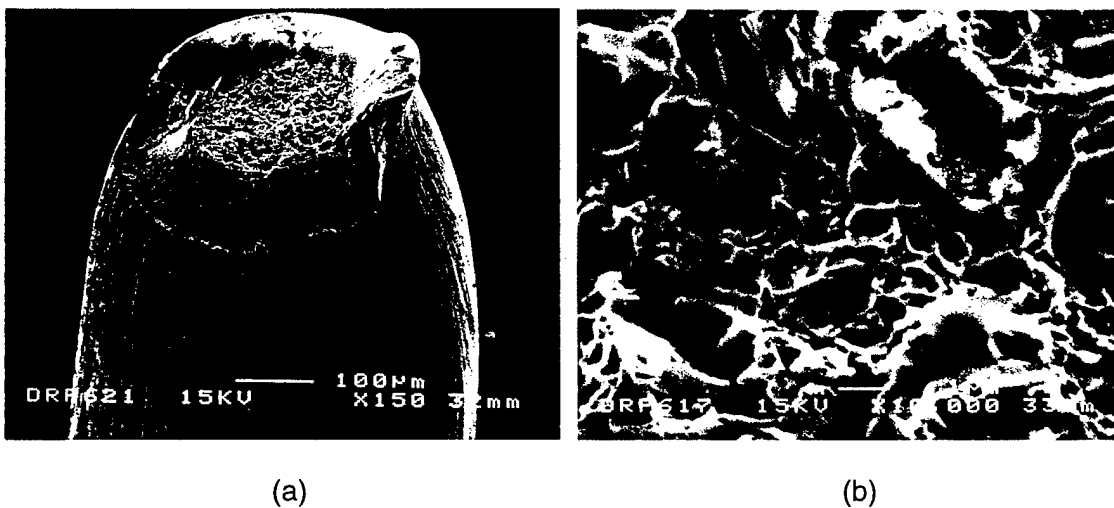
Cup and cone fracture (a), and microvoids (b) produced by tension overload.
